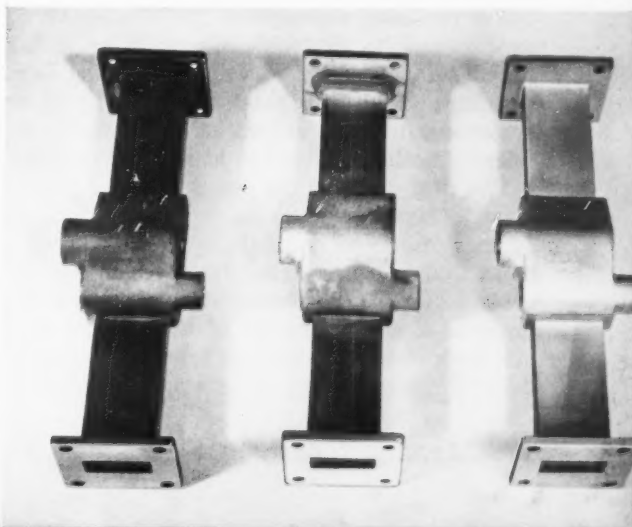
Comparison of surface texture of a sub-assembly as brazed (left), after cleaning by dipping (center), and after cleaning by wet blasting (right)
